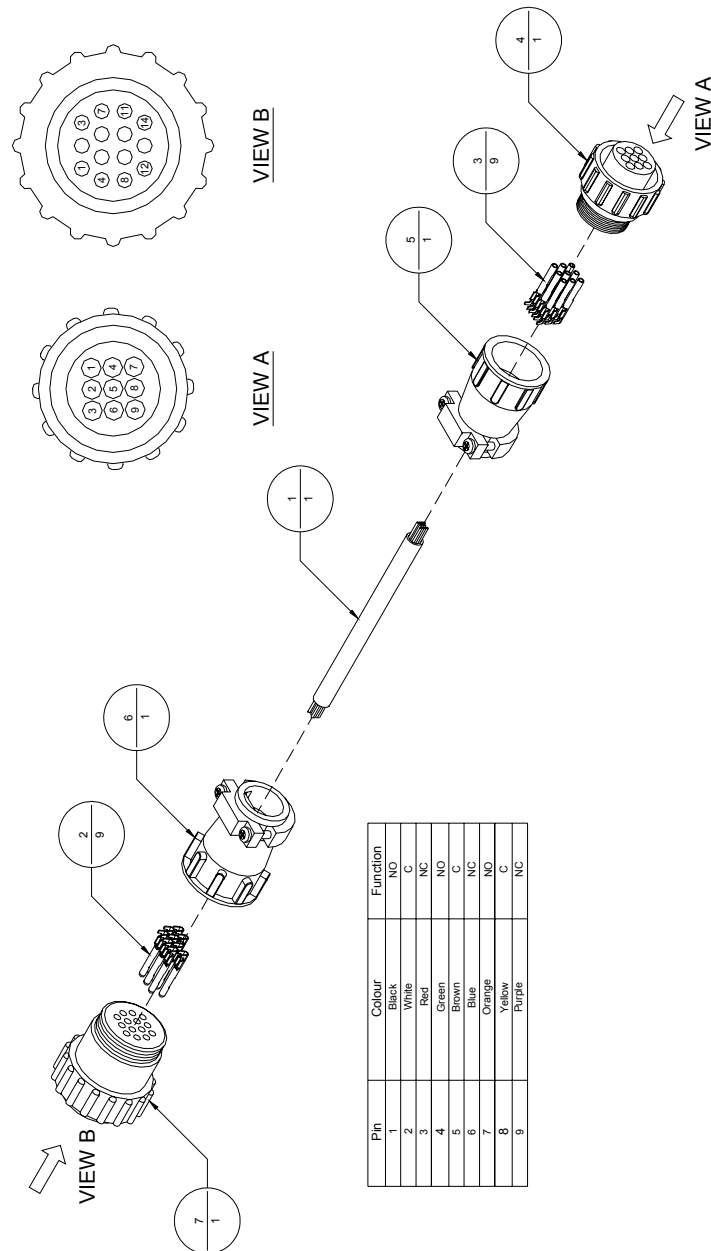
Output Cable Assembly, BK730 (9101656A)
